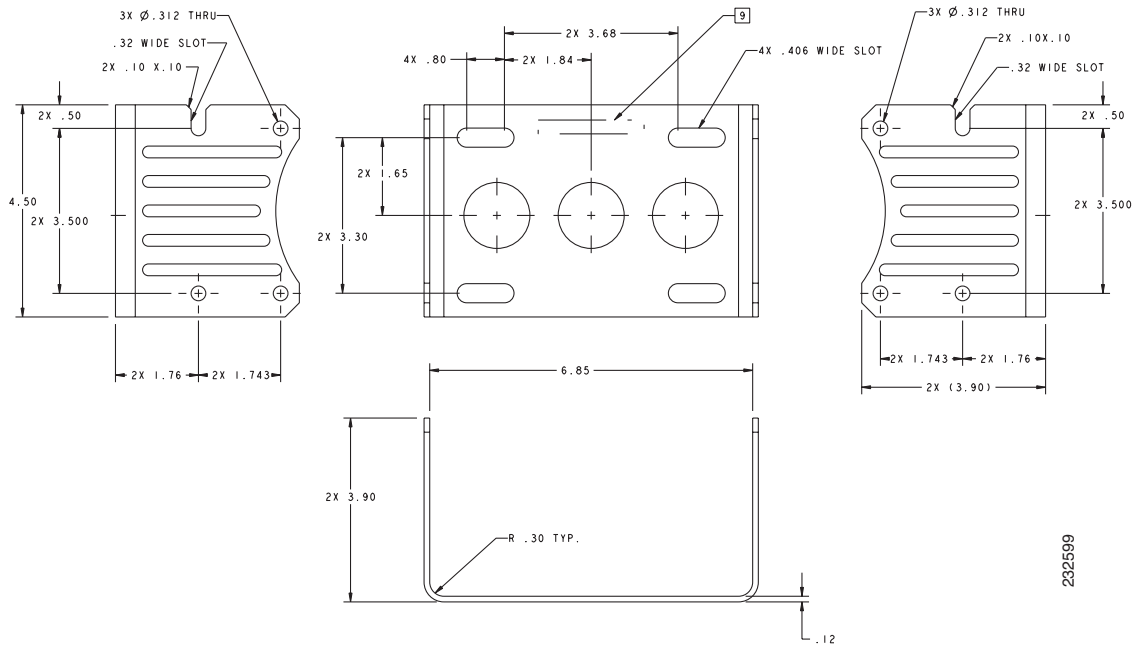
shows the dimensions of the Cisco 3230 Rugged Enclosure mounting bracket.
